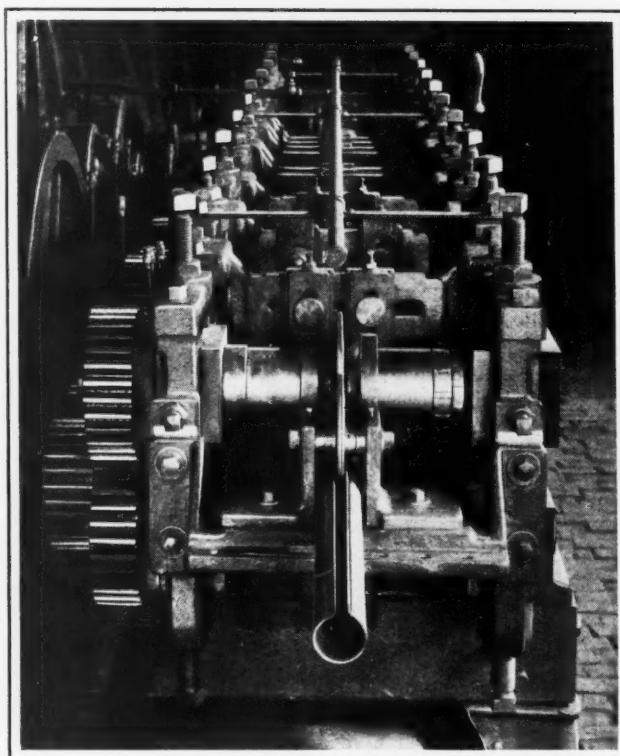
Arrangement of Rolls in Type of Machine used in cold-roll-forming the Heavier Sheet-metal Sections
